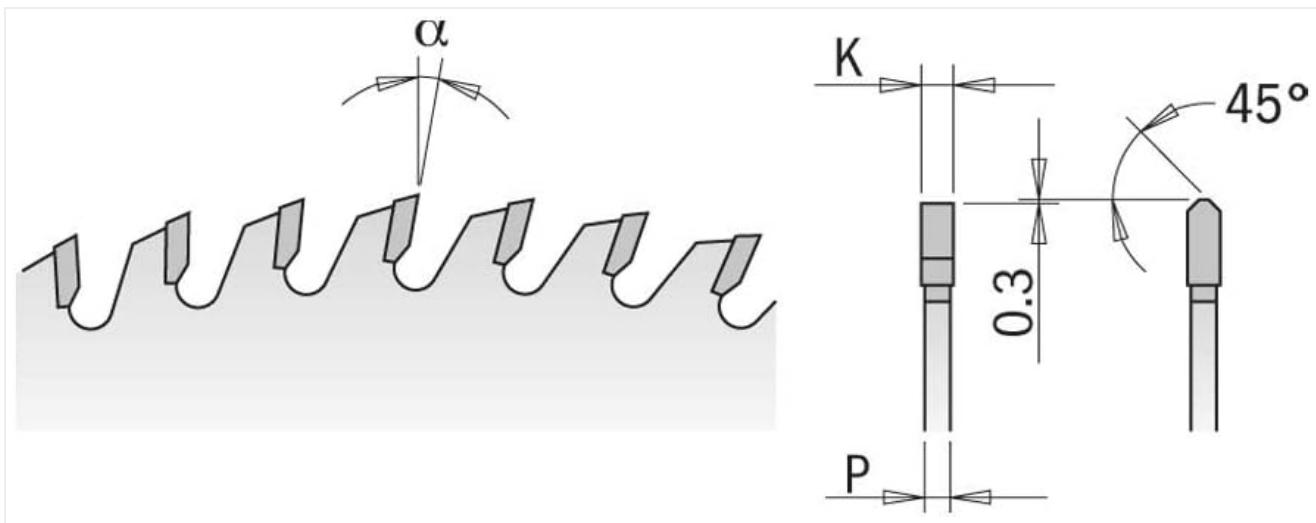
Detailed diagram illustrating the Triple Chip Grind (TCG) tooth geometry and key dimensions ( $K$ ,  $P$ , 0.3, 45 degrees) of the saw blade teeth, optimized for cutting aluminum.
